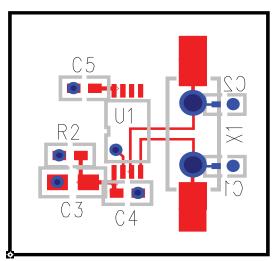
B. 844031-01 PC BOARD LAYOUT EXAMPLE
